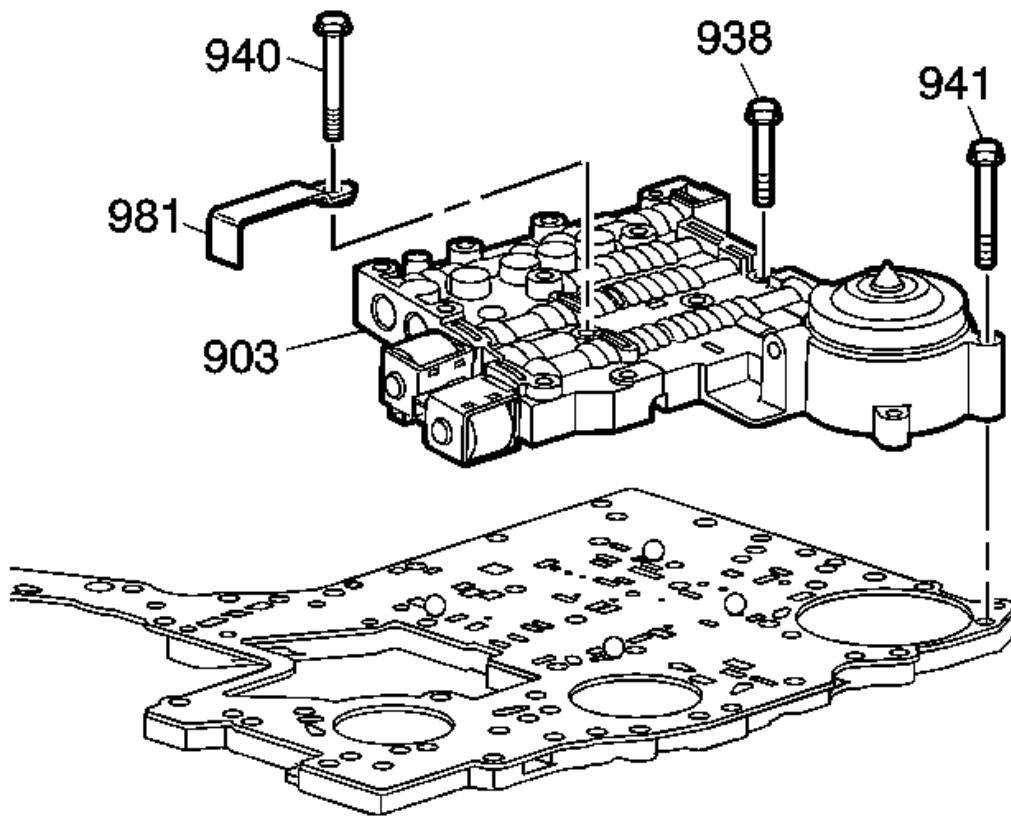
Identifying Lower Control Valve Assembly Retaining Bolts
